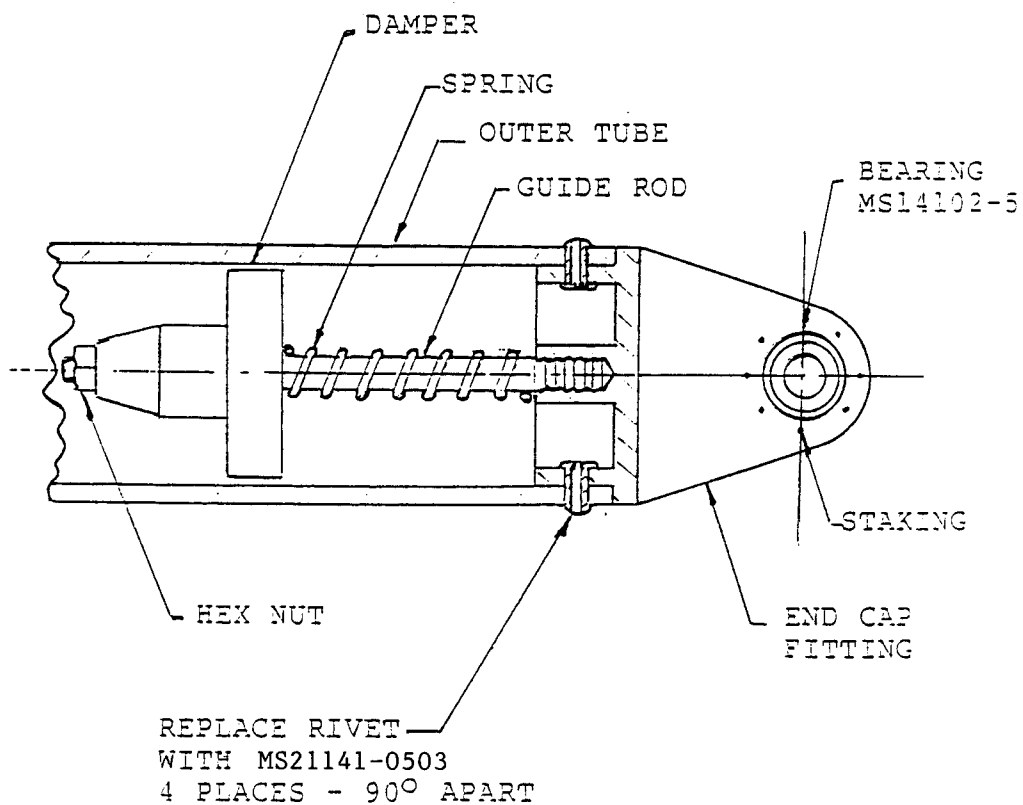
END CAP ASSEMBLY AND DAMPER
